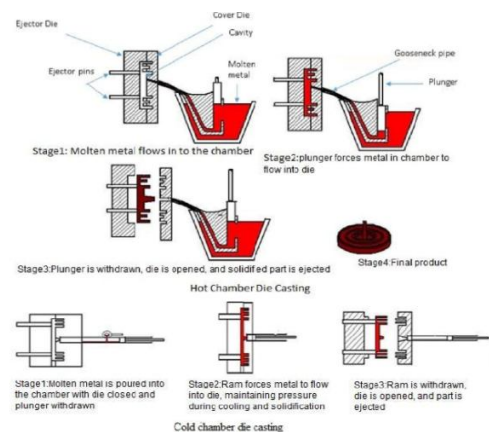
Outline of production steps in a typical cold chamber die casting operation
